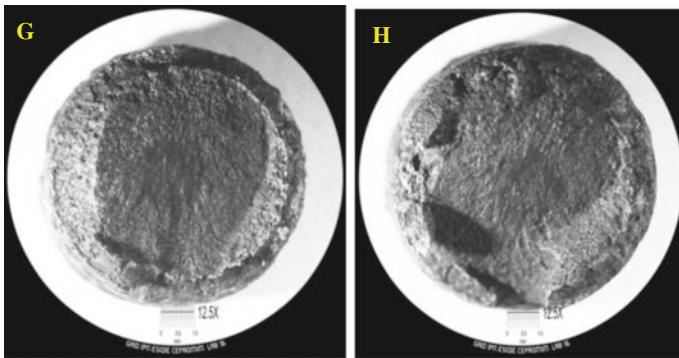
Fracture surface of the screws G and H, showing a fracture with ductile fracture characteristics
